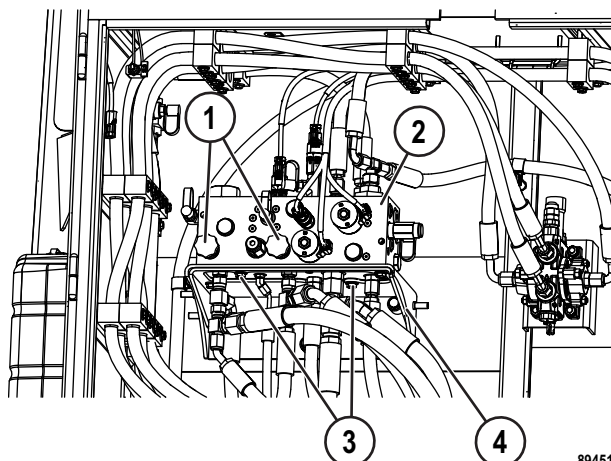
BRAKE MANIFOLD REMOVAL & INSTALLATION
